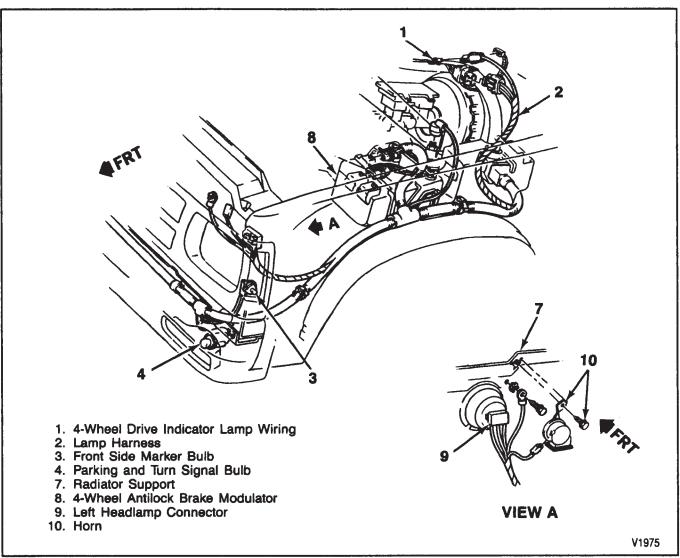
Left Forward Lamp Harness - 4-Wheel Antilock Brakes
